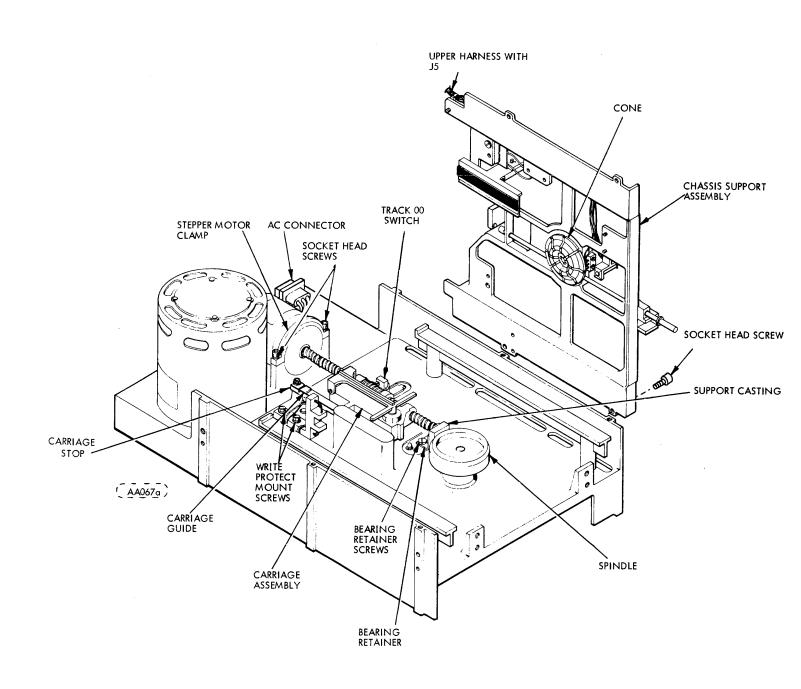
BASE AND CHASSIS SUPPORT ASSEMBLY
